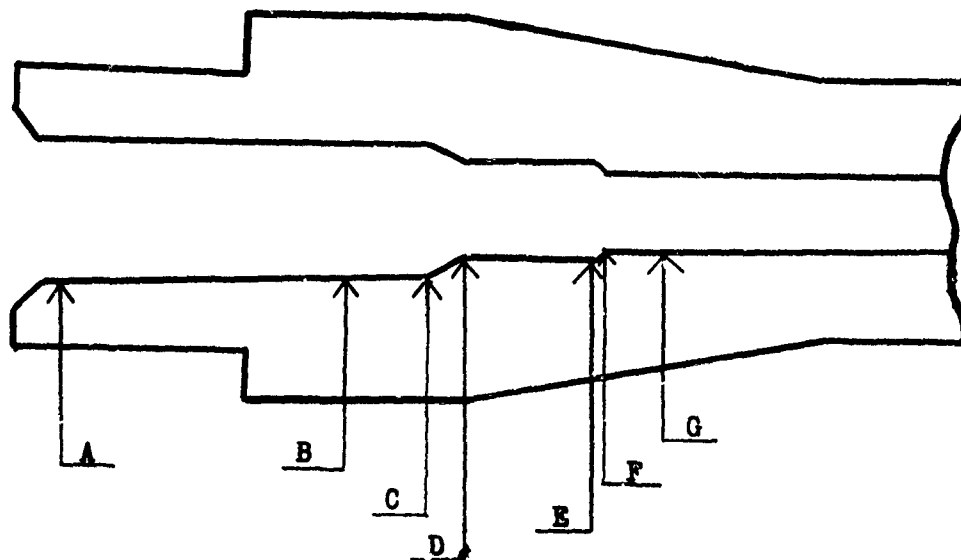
Sketch of Chamber for M16A1 Rifle and XM177E2 Submachine Gun. Letters Indicate Positions of Diameter Specifications as Shown on Standard Operation Instruction Sheet Used by the Manufacturer.
